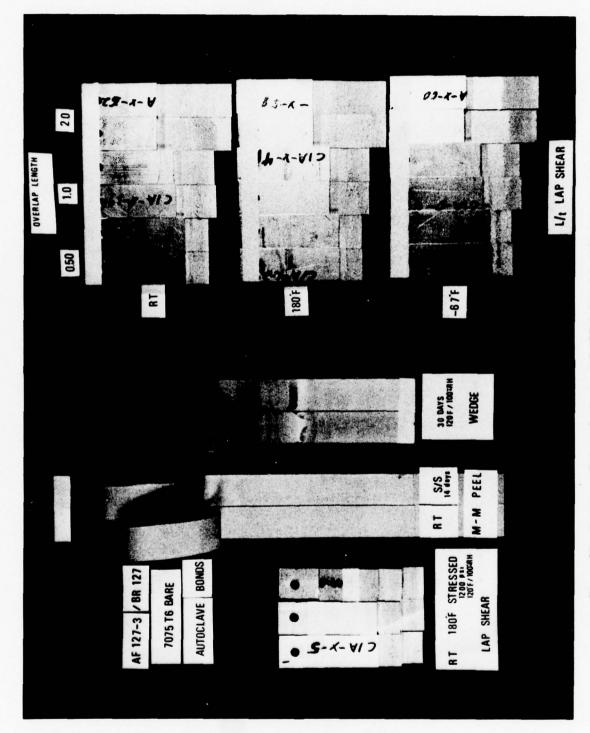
Specimen Failure Surfaces—AF 127-3, PasaJell 105, Autoclave Bonds
